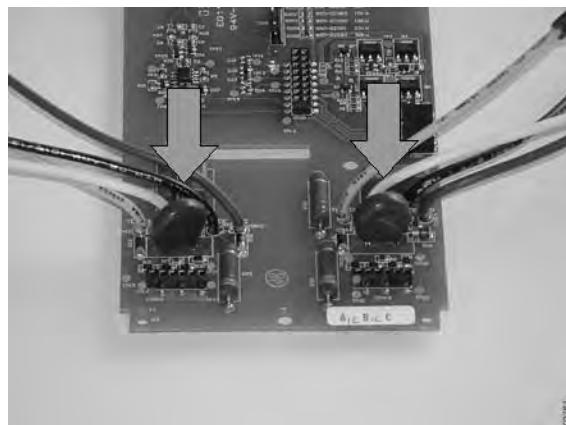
MOV location on Interface PCB (37 kW ~ 55 kW models)
